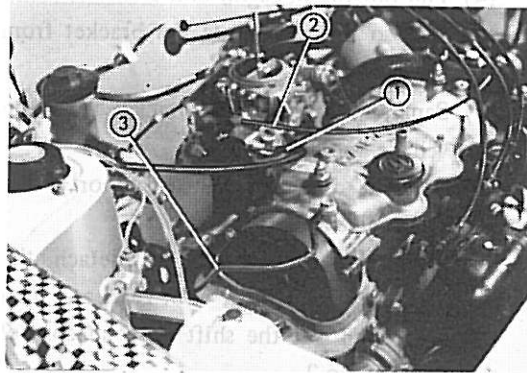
Removing Parts from Engine Compartment (Part 1)
